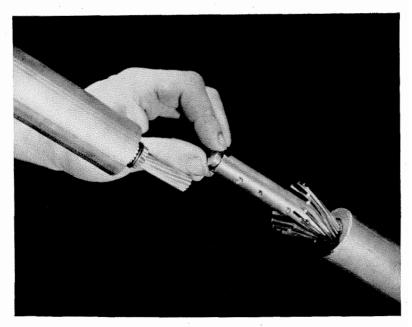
Assembly of conductor barrier ferrule for single-core styrene joint.
